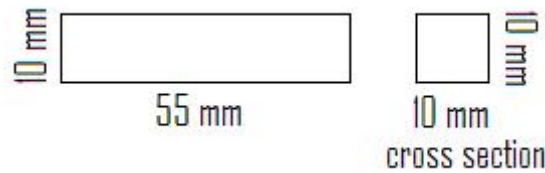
dimensions of un-notched Charpy bar impact test specimen.
